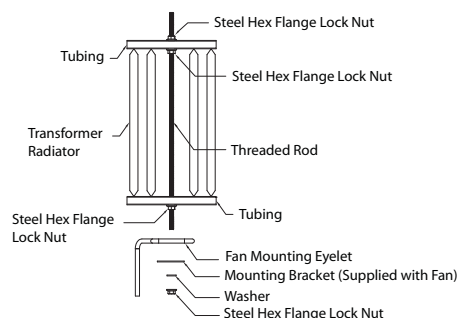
Accessory Guard-Mounting Kit Installation (Top View)
